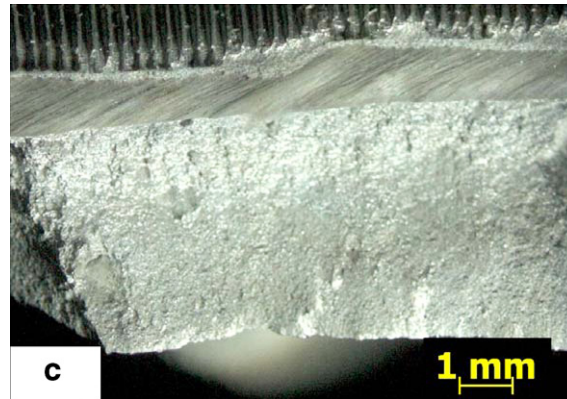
Planar facet (P) on a tensile fracture surface: weld 2 with tensile strength = 241 MPa, tool feed rate = 135 mm/min, tool speed = 423 rpm and tool pitch = 0.32 mm/rev.
